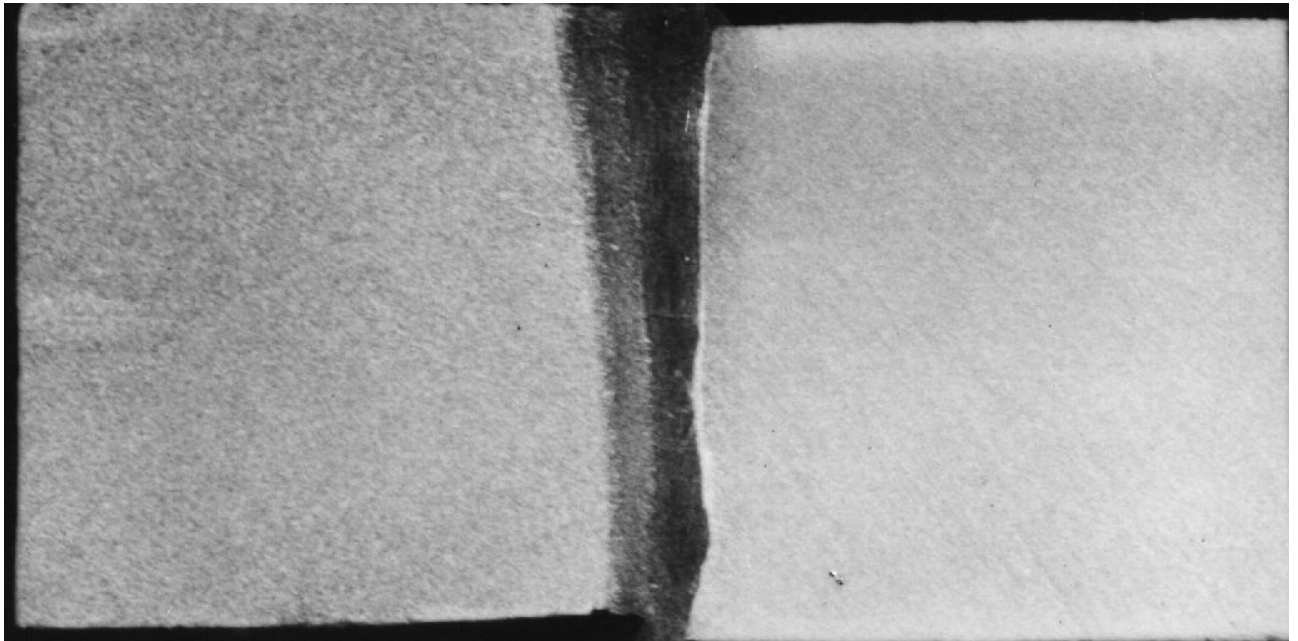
Cross-section of welding seam carbon St 45 with tool steel P18
